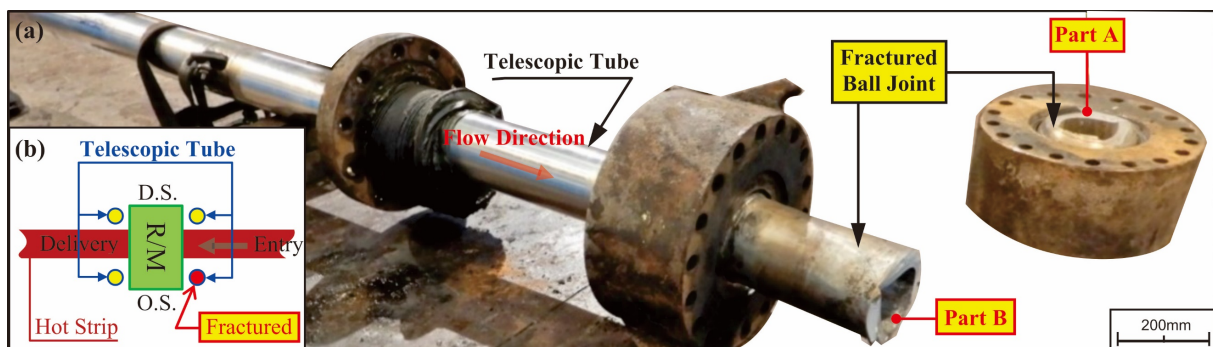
(a) Telescope tube with ball joint and (b) the location of the fractured ball joint.
